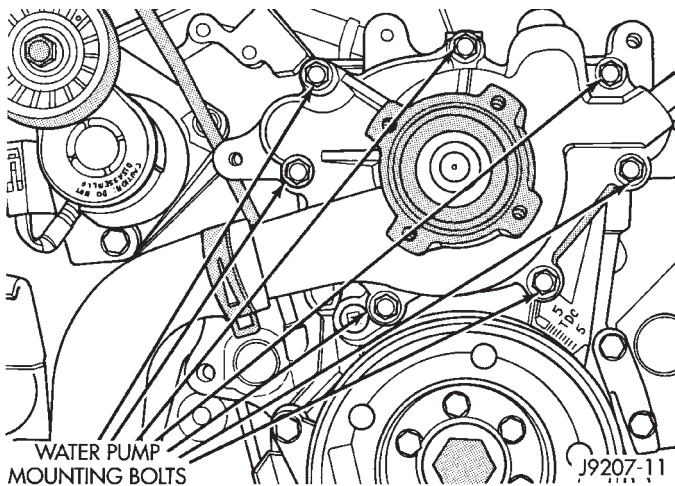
Water Pump Bolts—5.2L Engine—Typical
